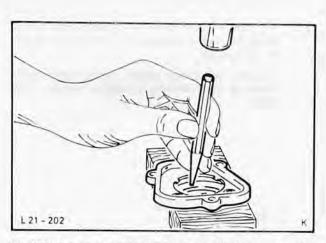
Drive auxiliary shaft oil seal out of front cover, using drift
